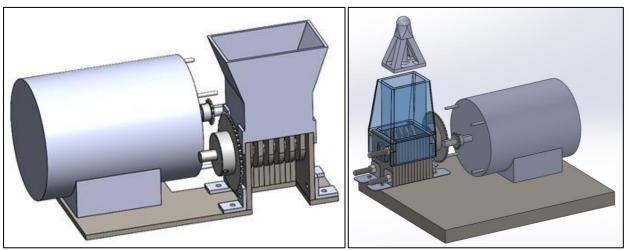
Sprint 3 CAD Updates (left), Final CAD Rendering (right)
